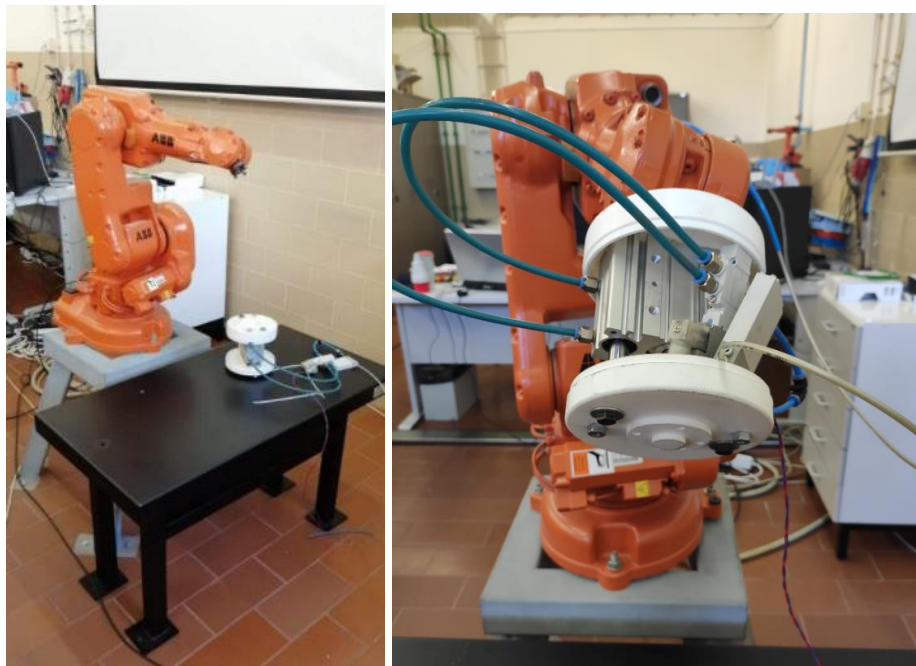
First assembly in the robot with 3D printed parts and all components described above.
